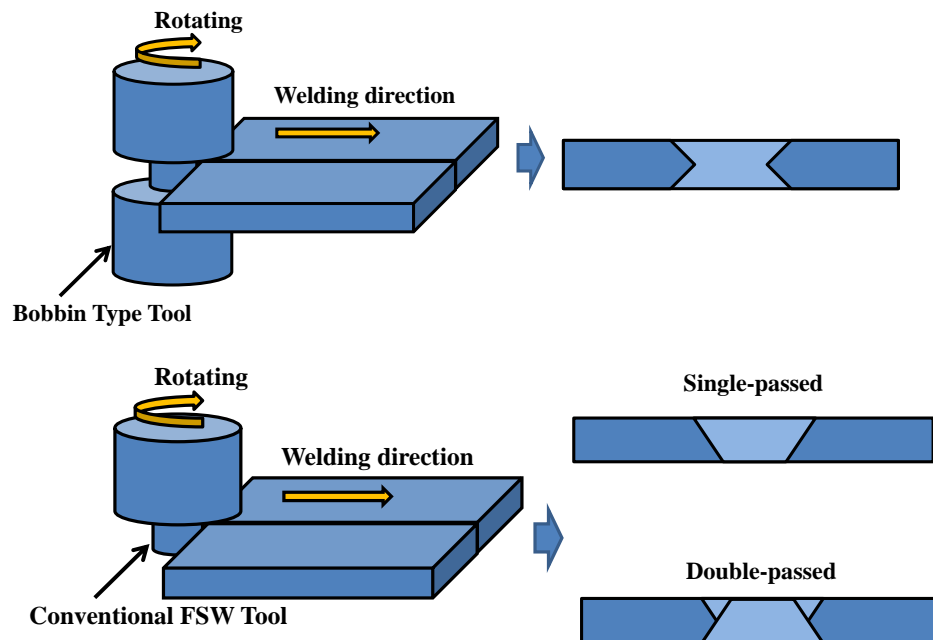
Schematics illustration of FSW process by using bobbin type tool and conventional tool.
